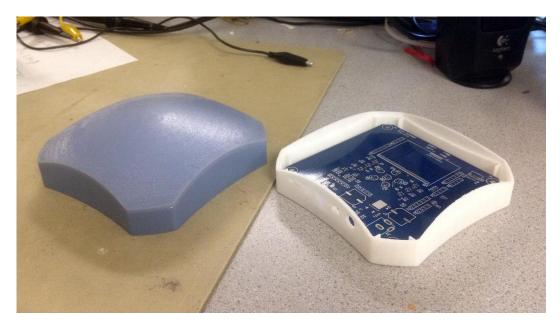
Manufactured PCB board of the hardware system and the 3D printed housing
